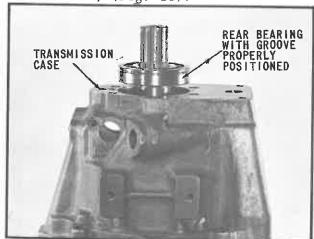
Output Shaft Bearing Properly Positioned for Assembly
